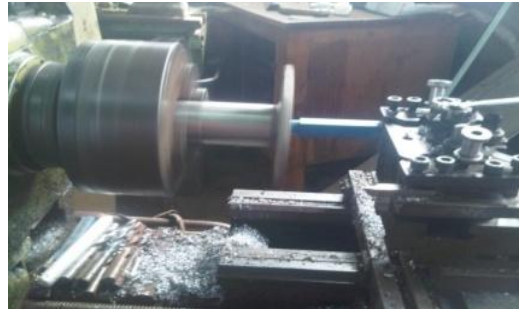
(d). Operations carried out on Mold using the Lathe Machine
